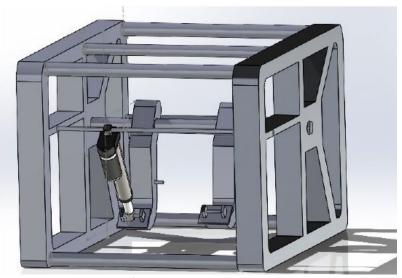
Illustration of the Actuator and the Brake Pedal Setting
